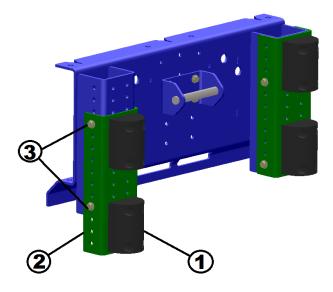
Bumper Adjustment Key 1 – Rubber Stop Key 2 – Side Rail Key 3 – Side Rail Hardware
